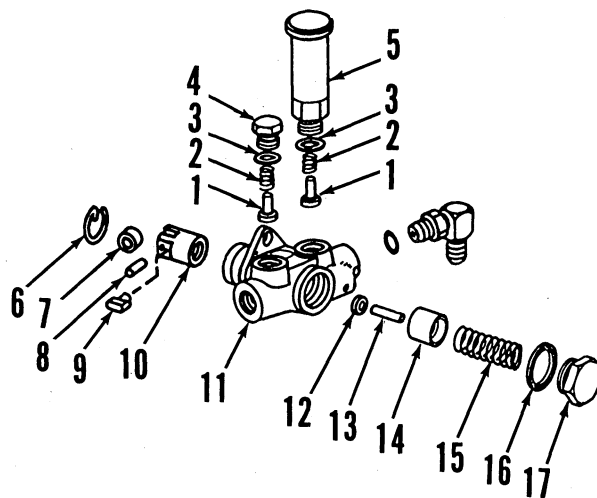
Exploded view of Nippondenso fuel transfer pump used on some models. Tractors may also be equipped with a Robert Bosch pump which is similar.
